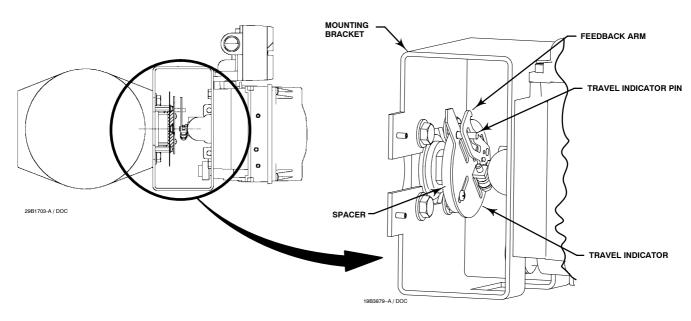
Mounting a Type DVC6030 Digital Valve Controller on a Rotary Actuator (Type 1032 Size 425A Shown)
